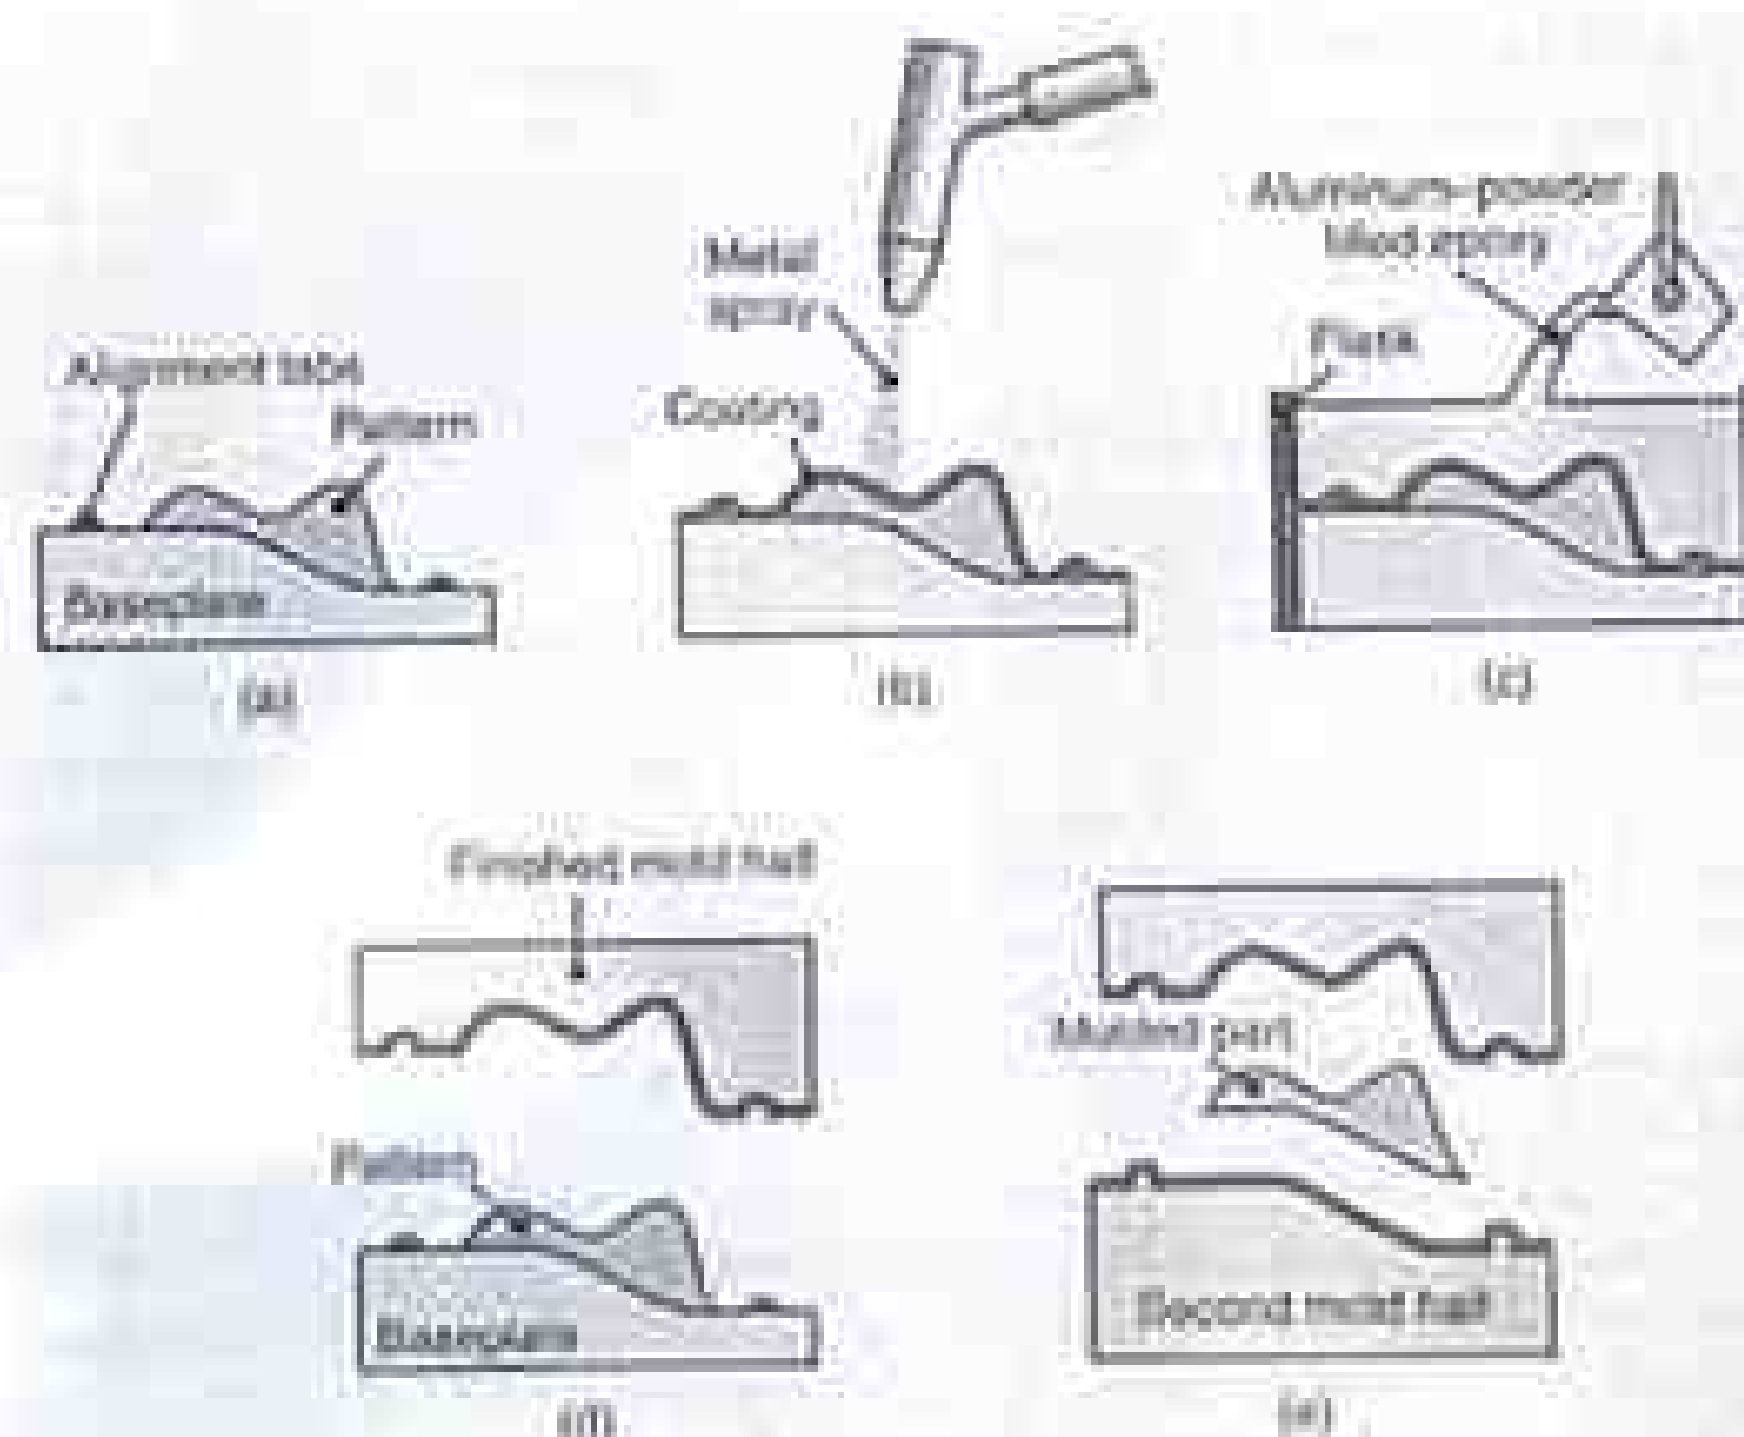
Production of tooling for injection molding by the sprayed-metal tooling process. (a) A pattern and baseplate are prepared through a rapid-prototyping operation; (b) a zinc-aluminum alloy is sprayed onto the pattern; (c) the coated baseplate and pattern assembly are placed together in a flask and backfilled with aluminum-impregnated epoxy; (d) after curing, the baseplate is removed from the brushed mold; and (e) a second mold half suitable for injection molding is prepared.
